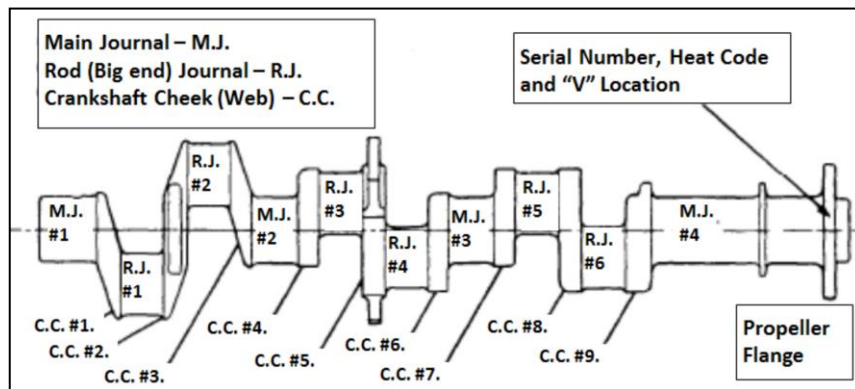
Crankshaft component identification (Teledyne Continental CSB96-8)
